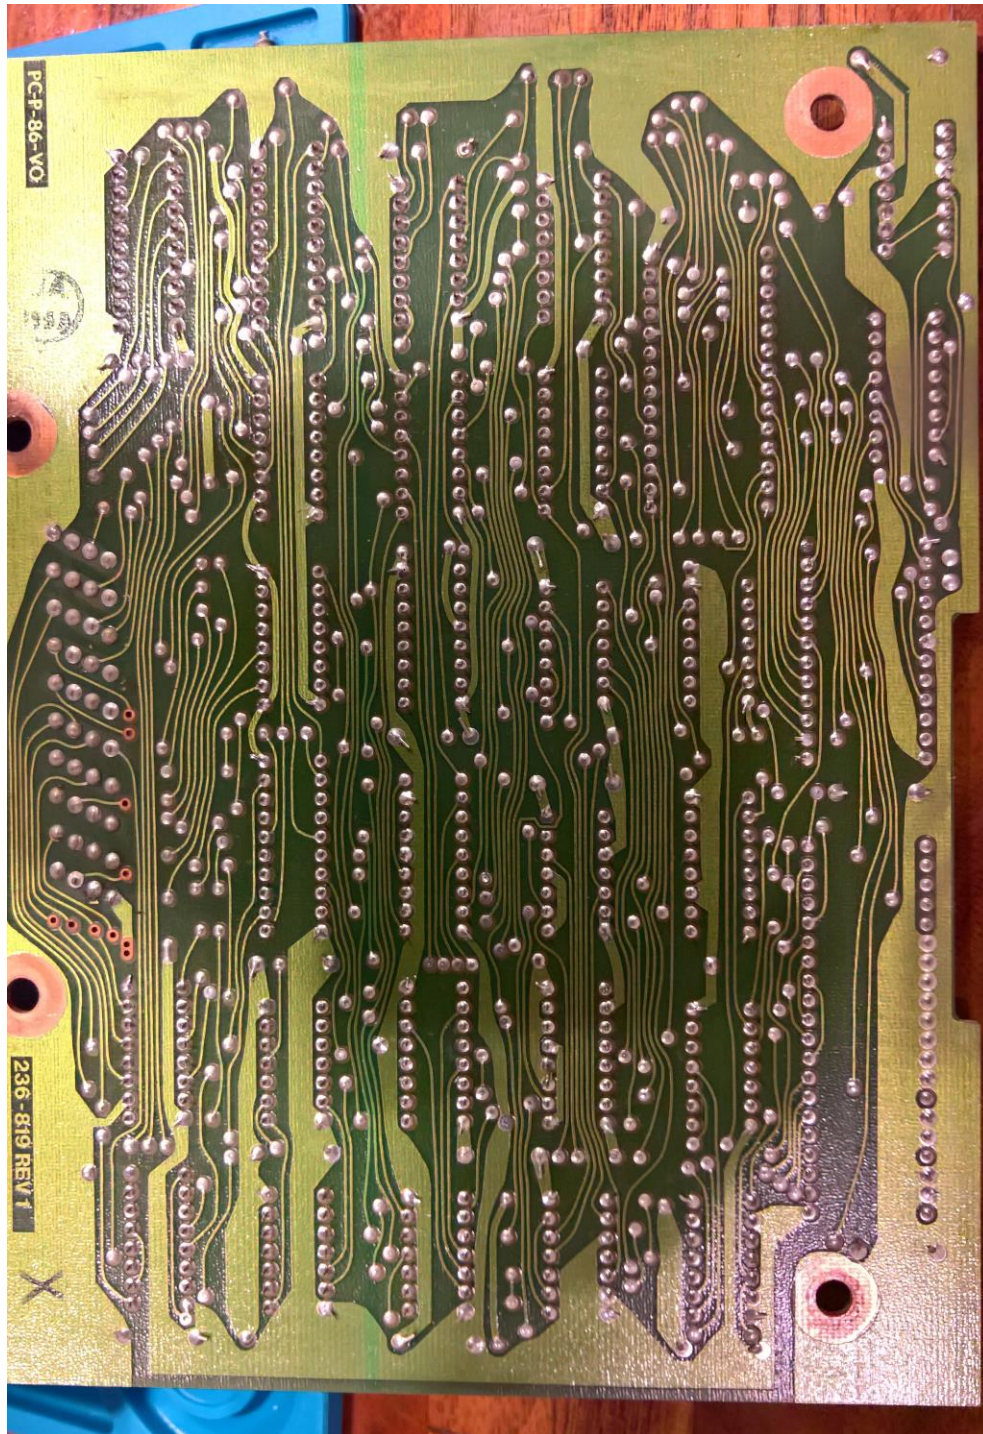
Jerrold PlayCable Upper PCB Solder Side
